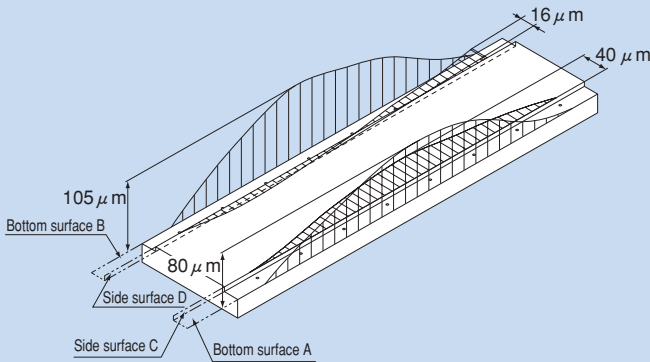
Surface Accuracy of the LM Guide Mounting Base (Milled Surface Only)
